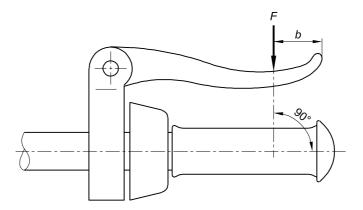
Method of fitting the gauge to the handbrake-lever and handlebar (minimum grip length is shown)
